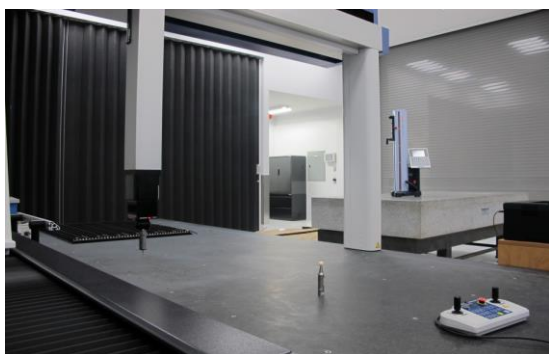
Mitutoyo CRYSTA coordinate measuring machine (CMM)
